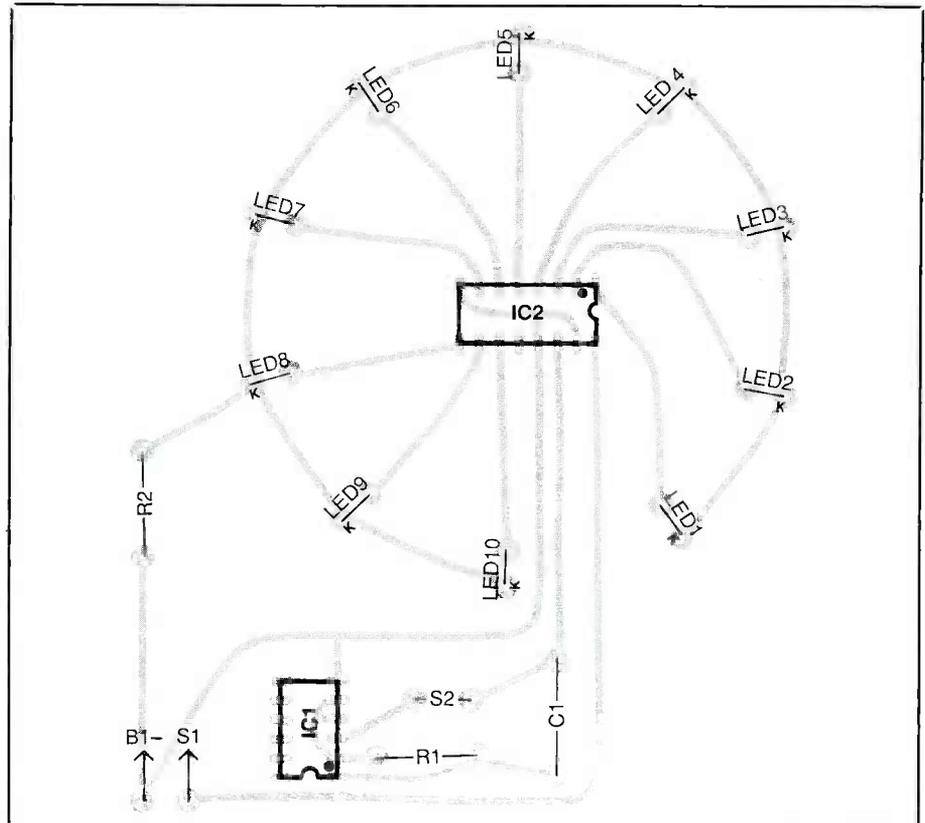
Wiring guide for pc board. If you use perforated board and point-to-point wiring, use this as a rough guide to component layout.
